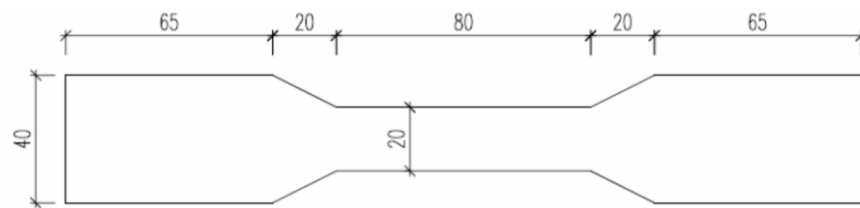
SPECIMEN DIMENSION OF COUPON TESTS.
